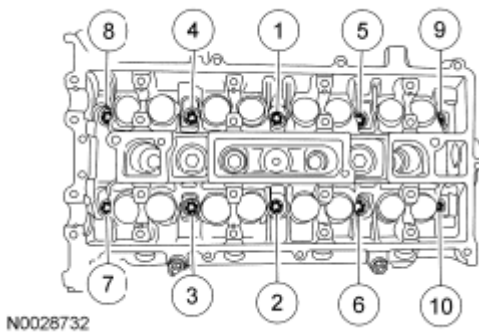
Identifying Cylinder Head Bolt Tightening Sequence
